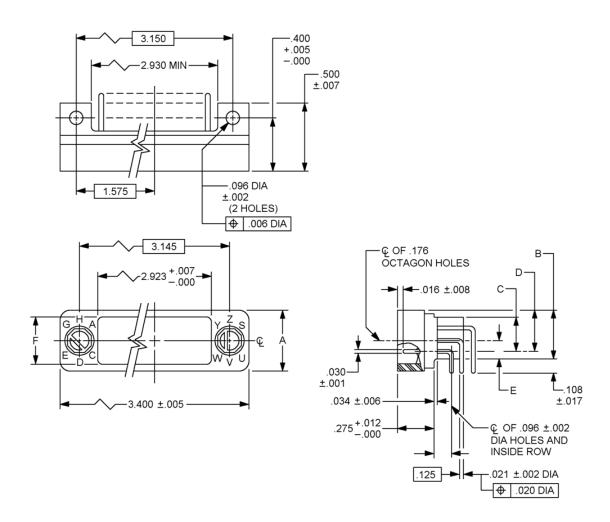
Connectors, pin, right-angle, for multilayered printed wiring board .100 (2.54 mm) spacing.
